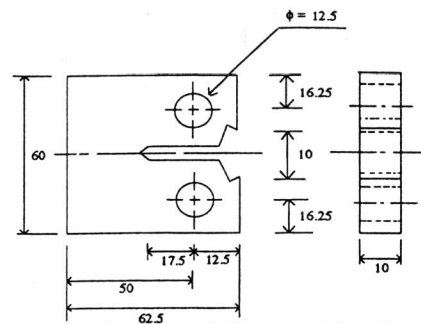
Specimen configuration for fatigue crack propagation tests.
